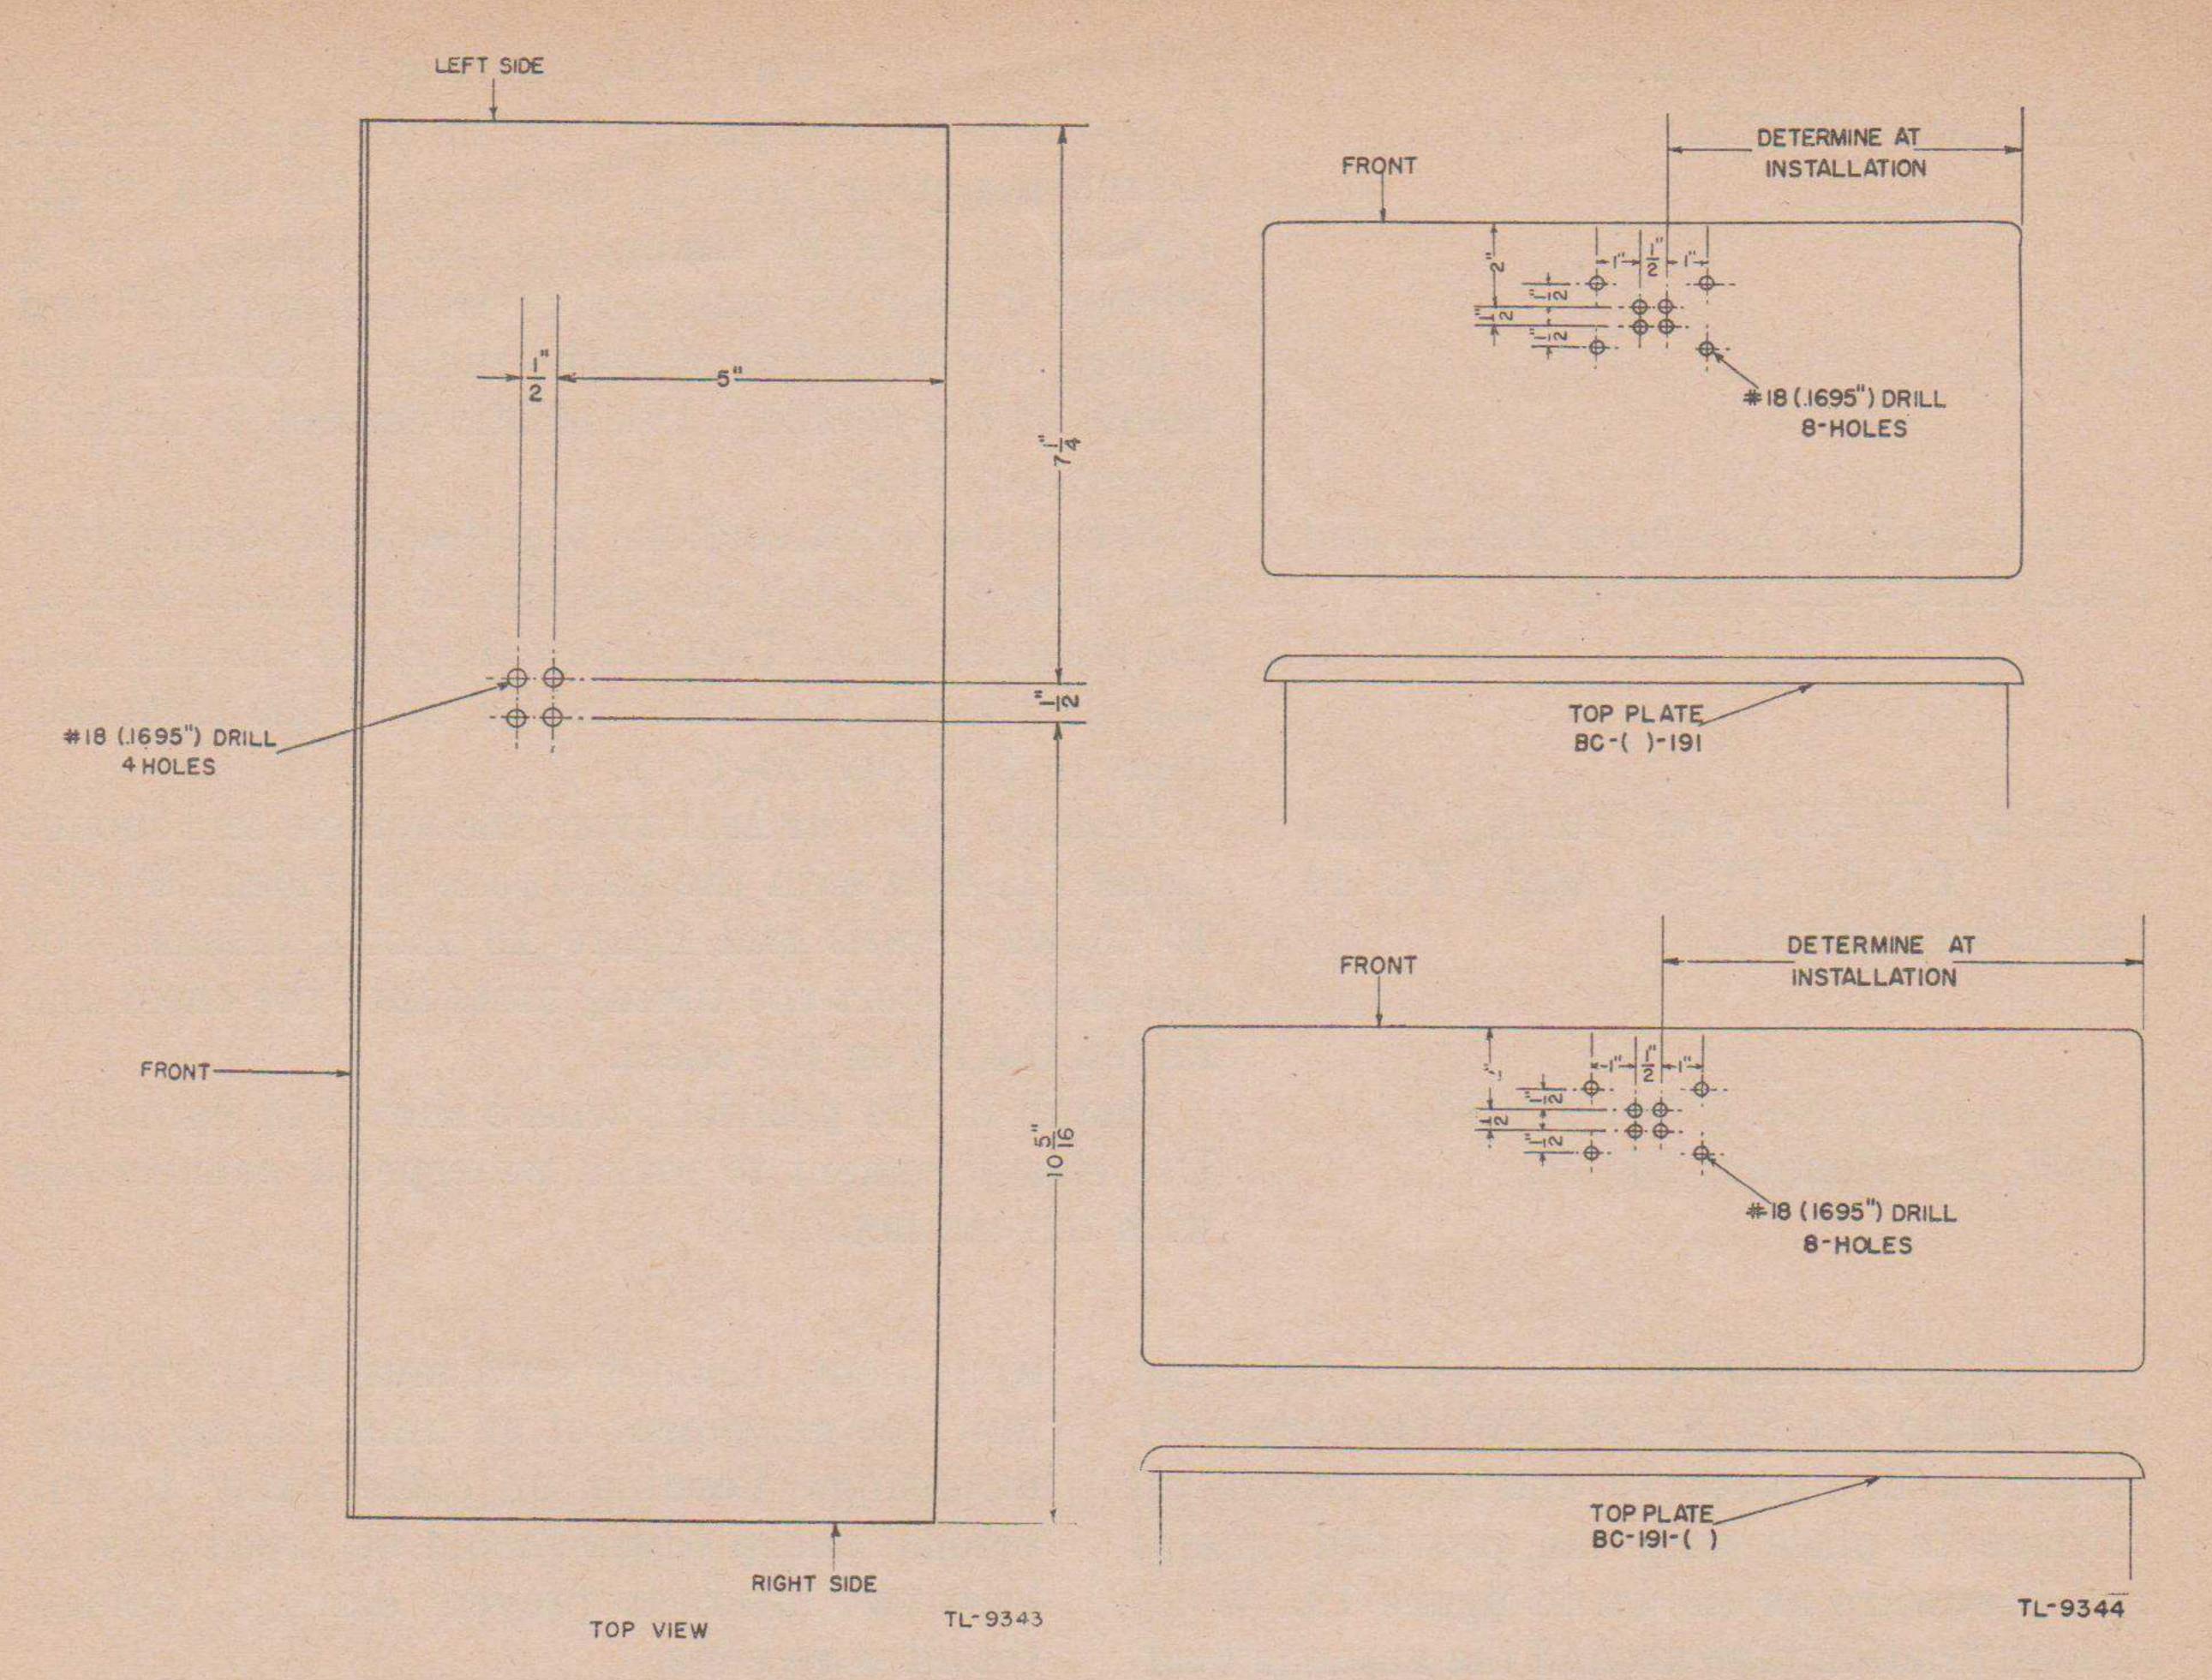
Drilling cabinet of Radio Receiver BC-312-() for Mounting FT-178.
